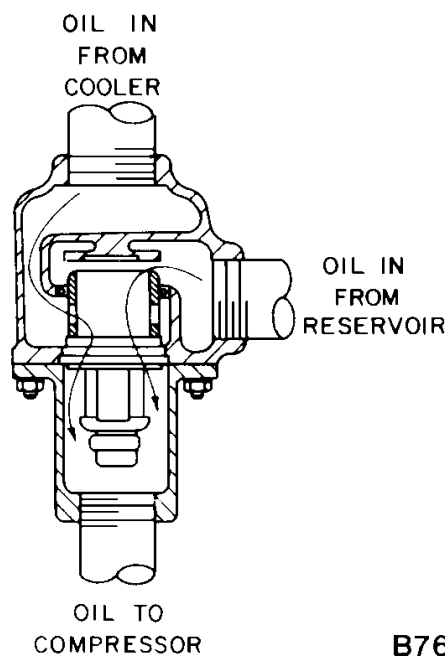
THERMAL CONTROL (THERMOSTATIC MIXING) VALVE
